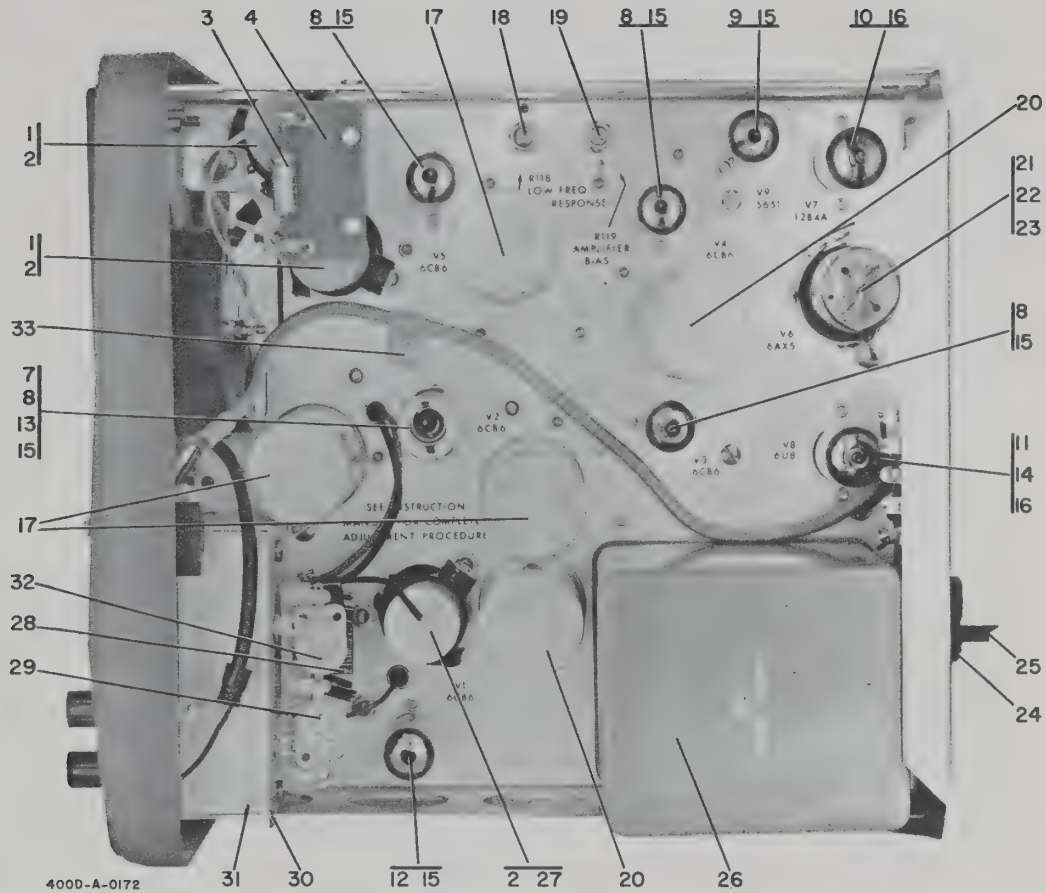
Main Chassis Assembly (Sheet 1 of 2)
